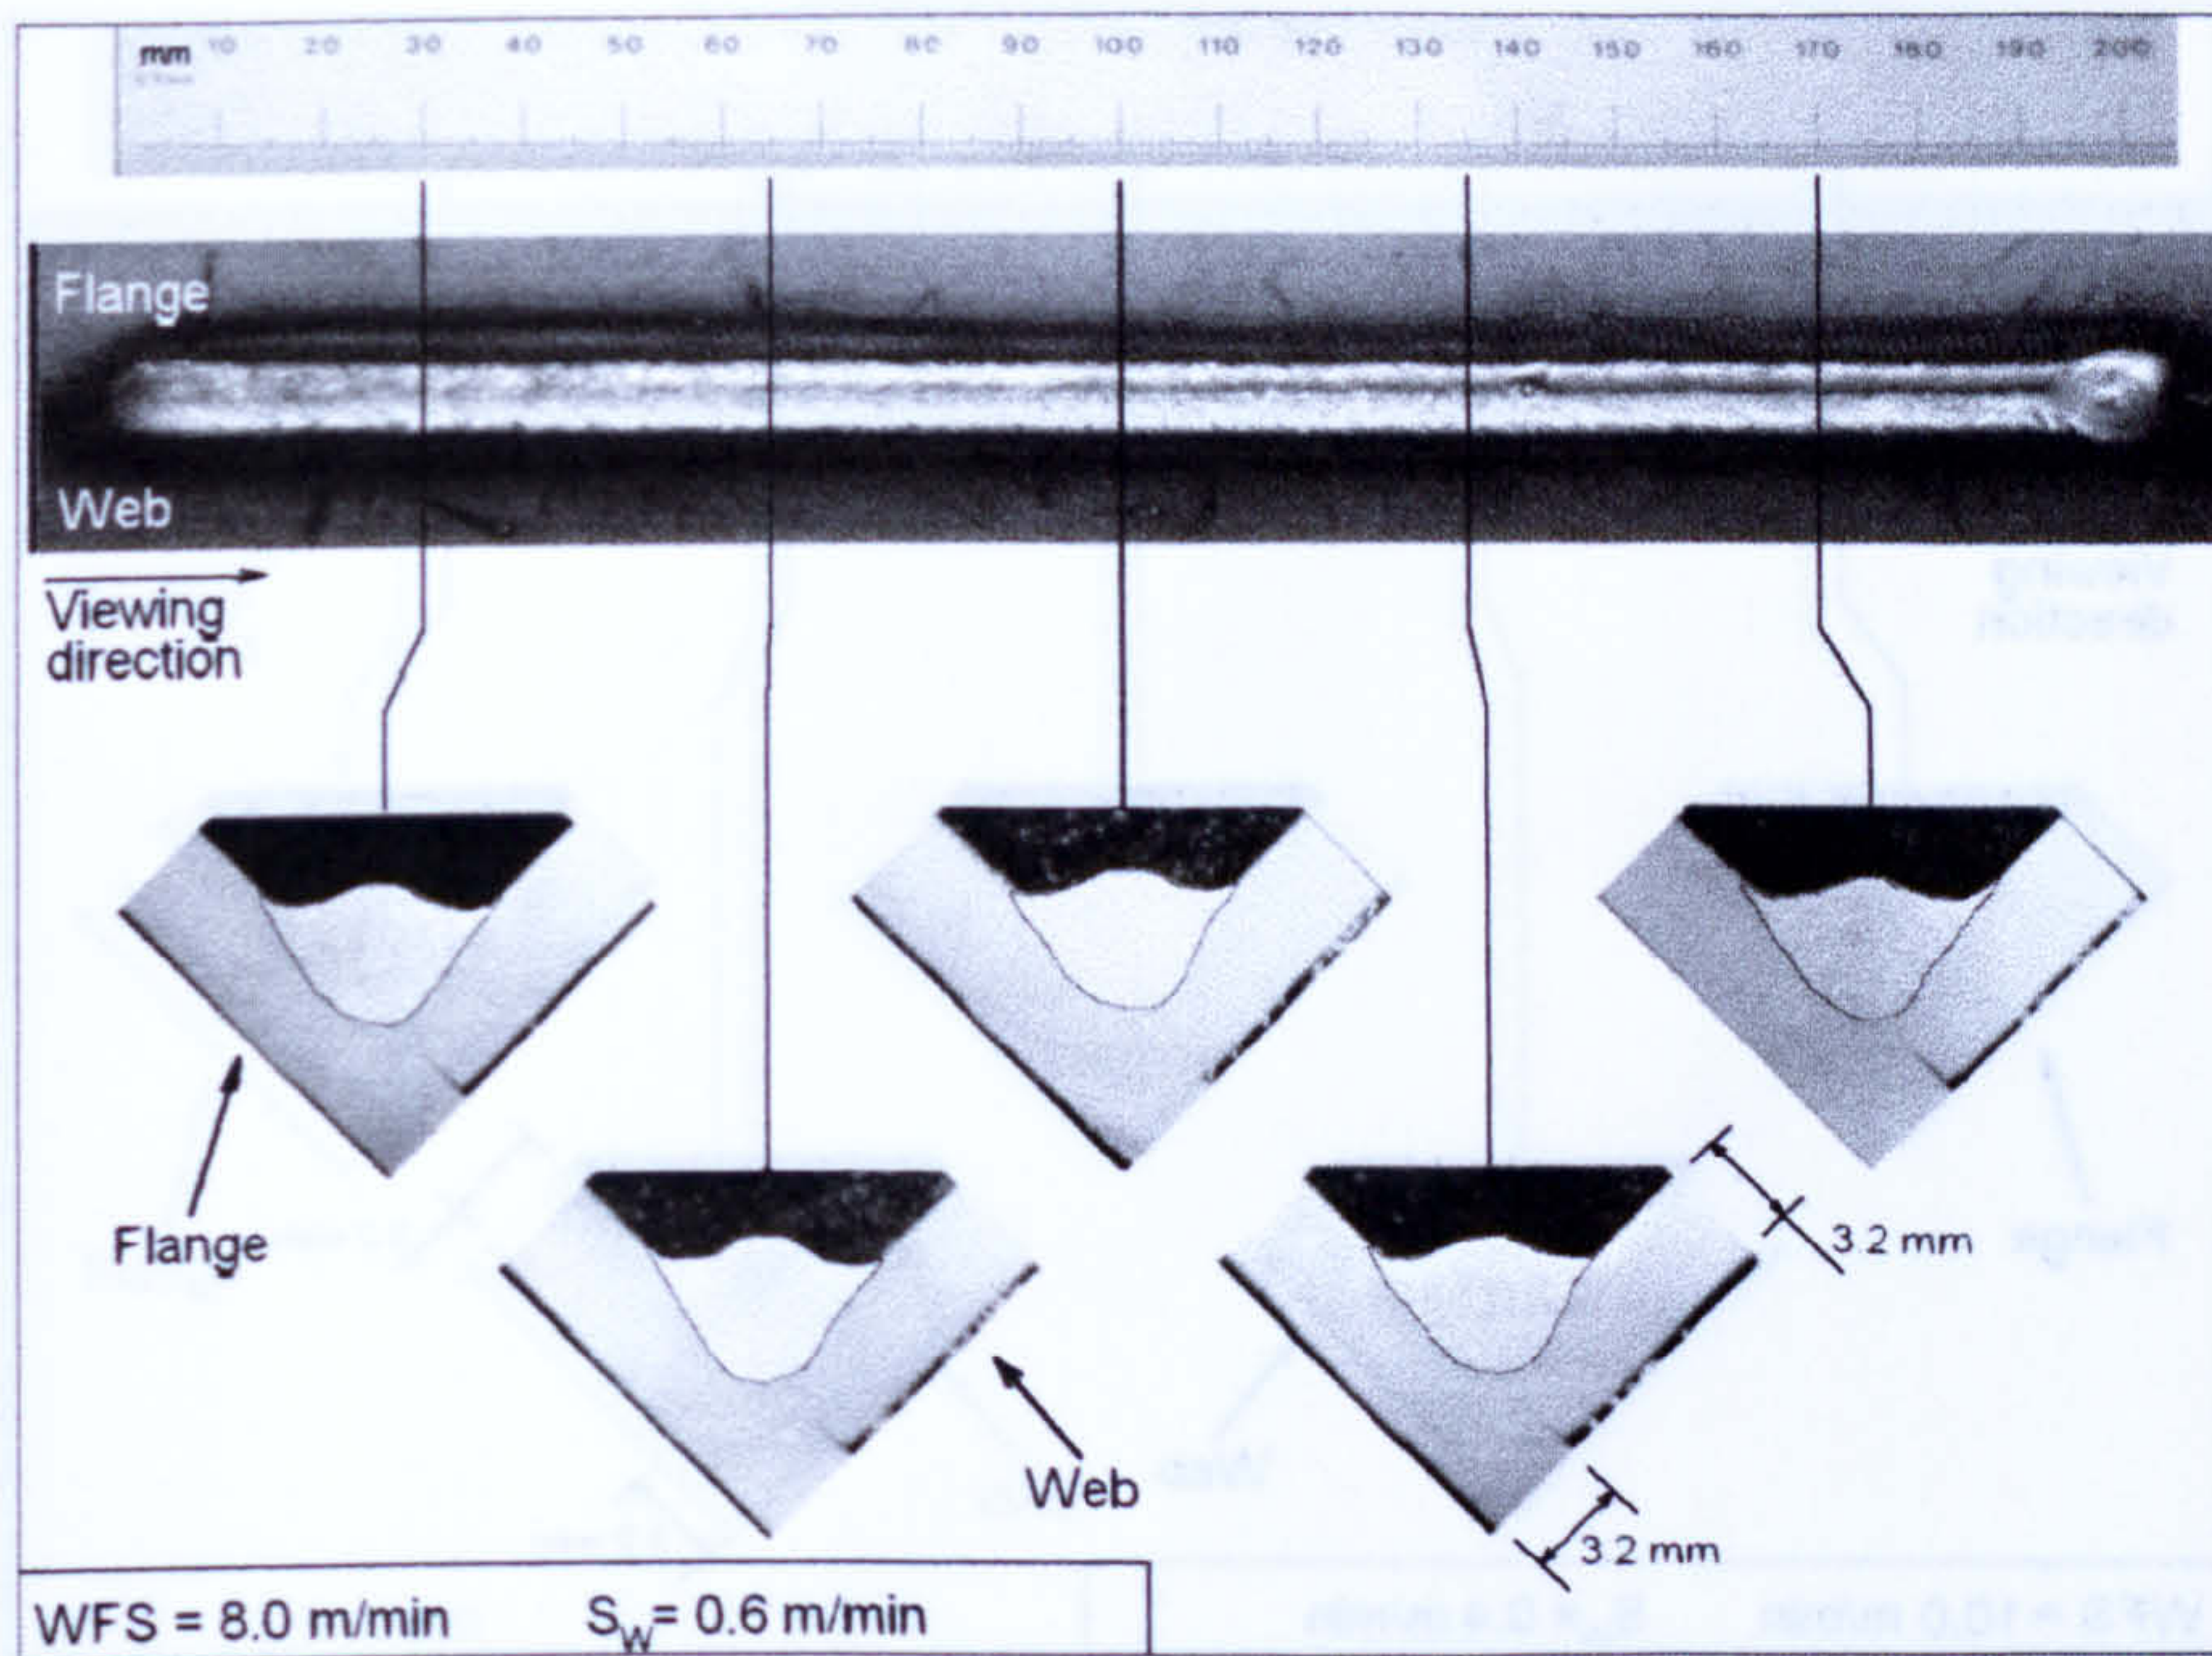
Bead appearance and bead profiles along the weld for the stand-off controlled fillet welding trial "S2".
